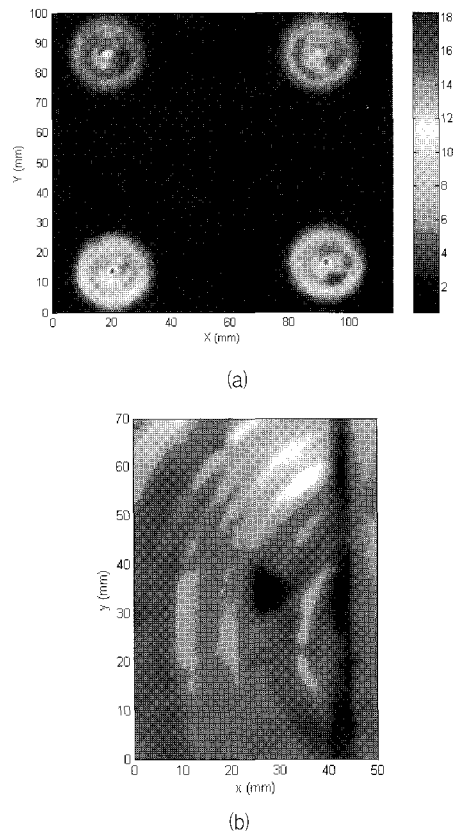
C-scan images of (a) four bonded, 38.1 mm diameter titanium inserts in an aluminum honeycomb, and (b) A 25 mm thick Balsa wood
